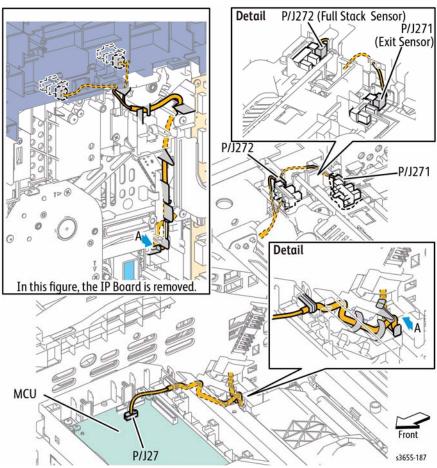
MCU Board to Full Stack Sensor / Exit Sensor
